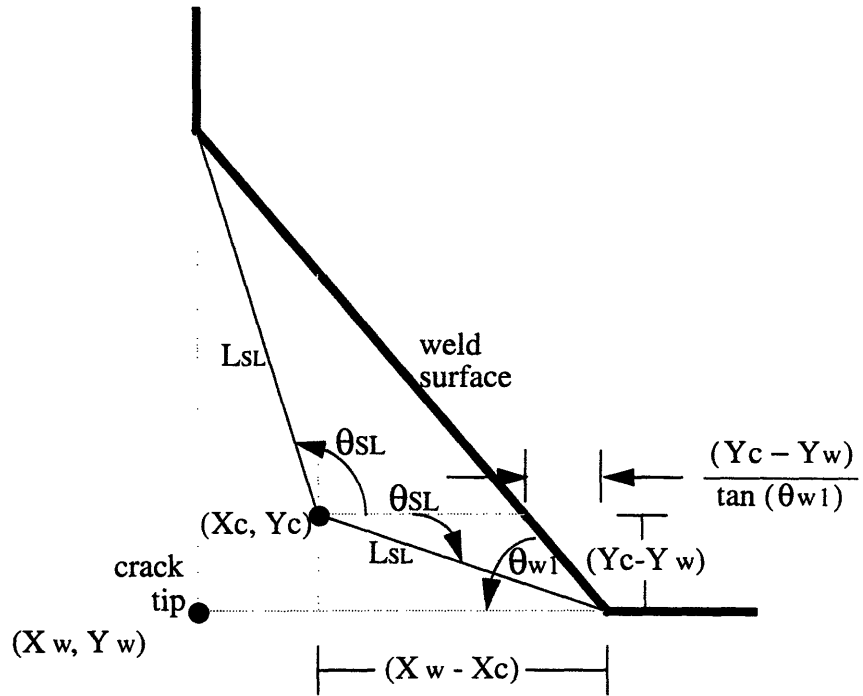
(a). Slip line length for angles ending at the weld surface.
